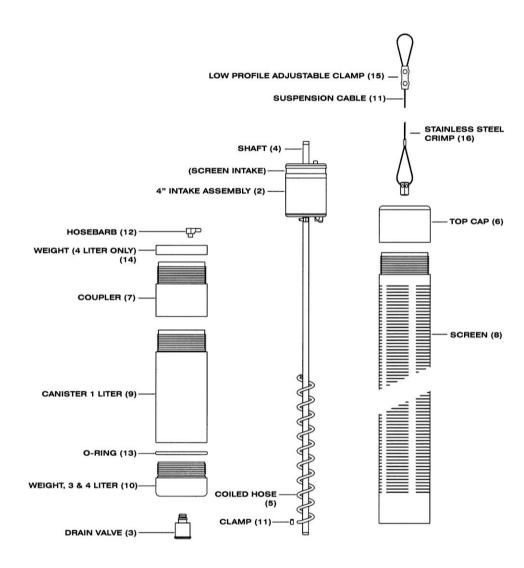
Standard 4" PRC Skimmer Assembly (3 & 4 Liter)
